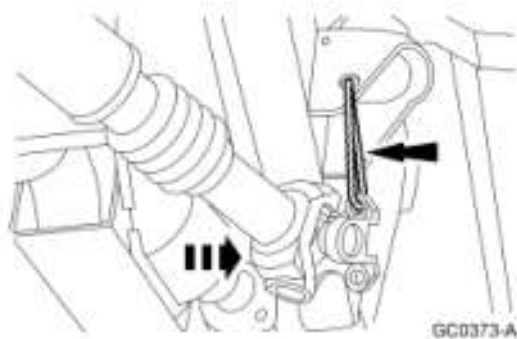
Positioning Driveshaft Aside & Support With Mechanic's Wire
